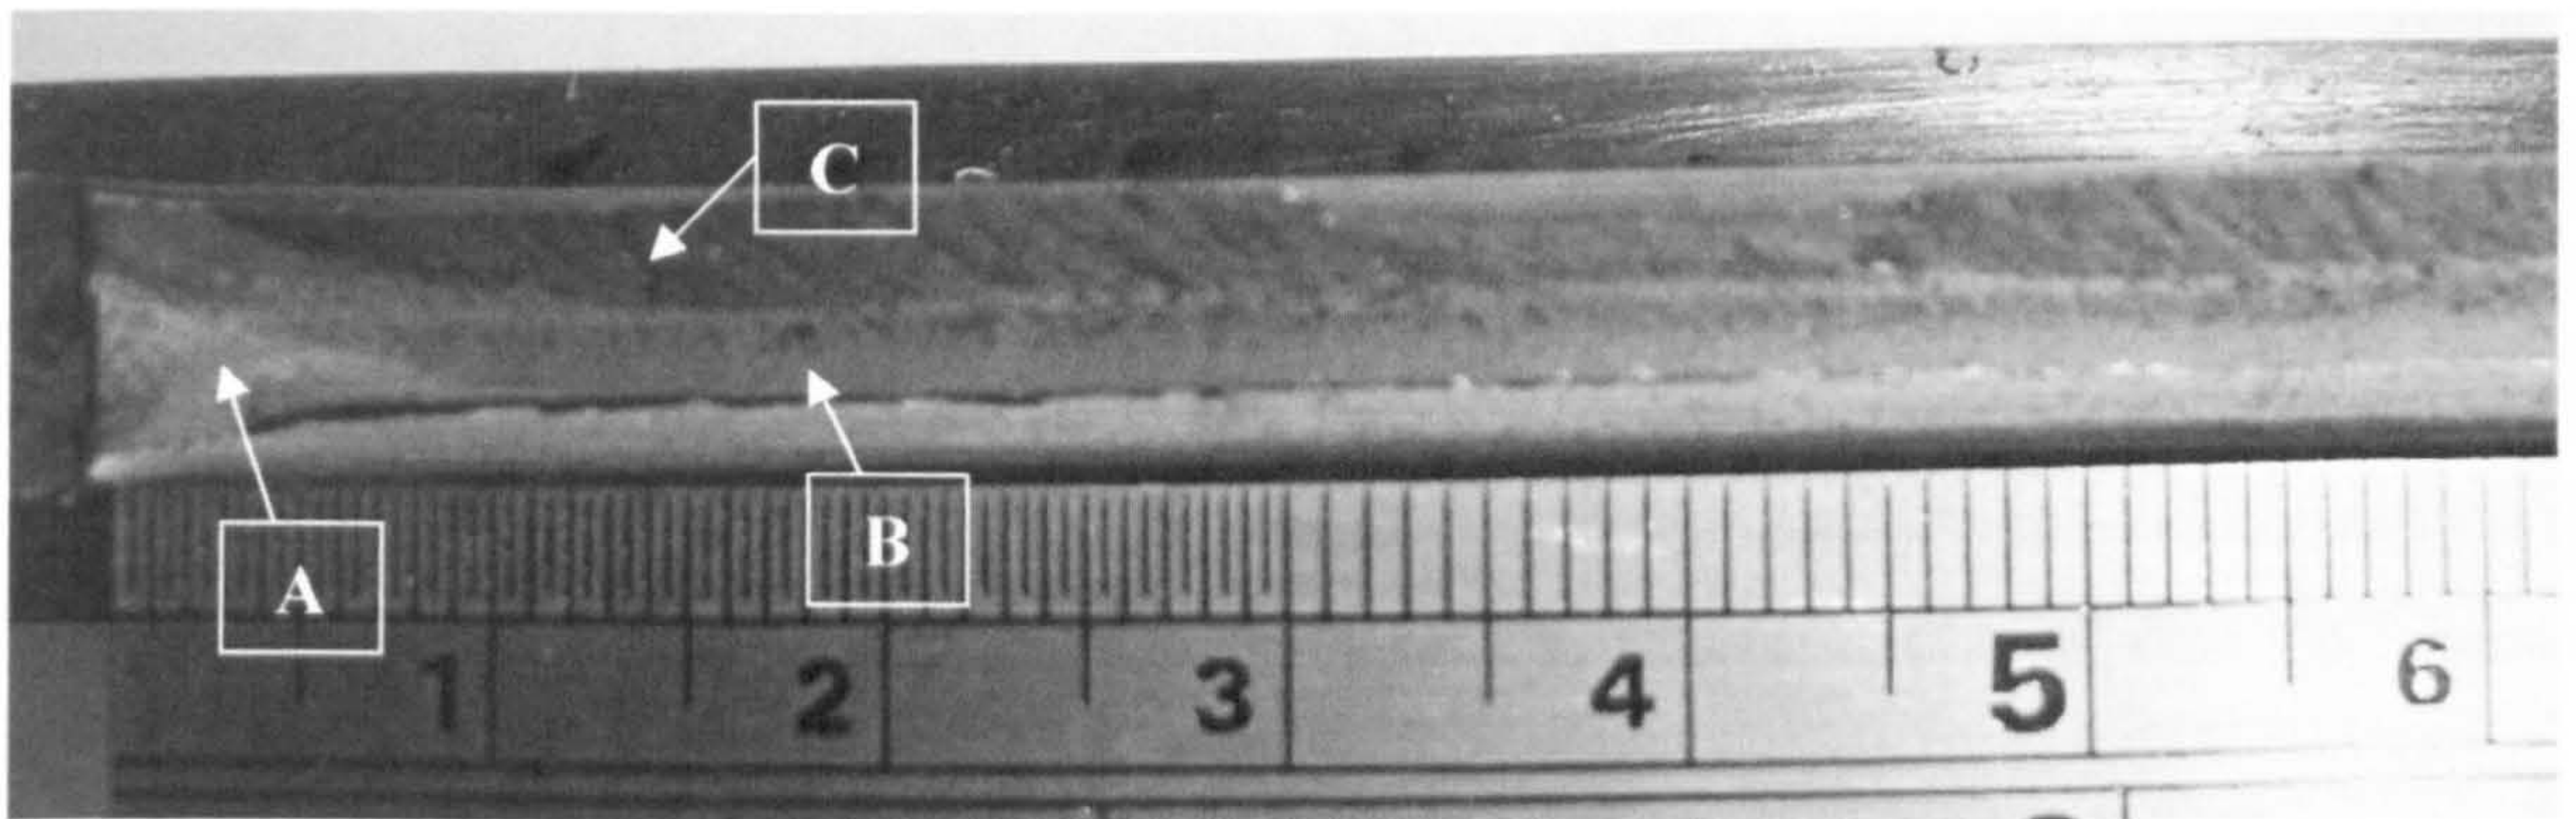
Photographs of the fracture surface of tear test of 8mm ligament thickness.
